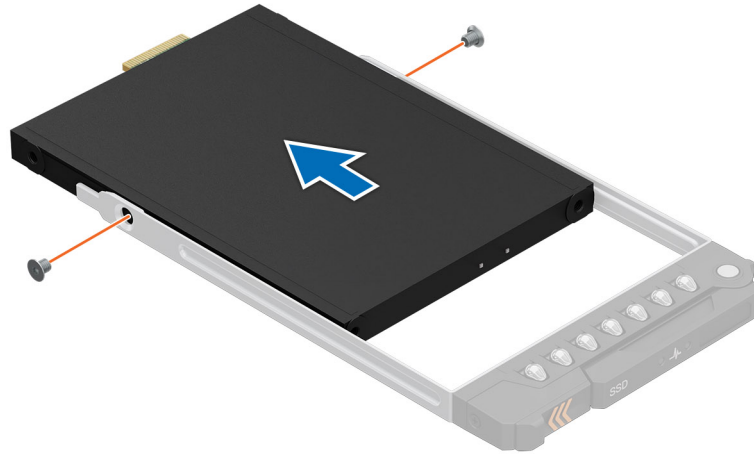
Removing an EDSFF E3.S drive from the drive carrier
